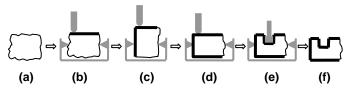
Process sequence of the existing line. (a) stock, (b) bottom face milling (p_1) , (c) left face milling (p_2) , (d) top face milling (p_3) , (e) slot milling (p_4) , and (f) finished part
